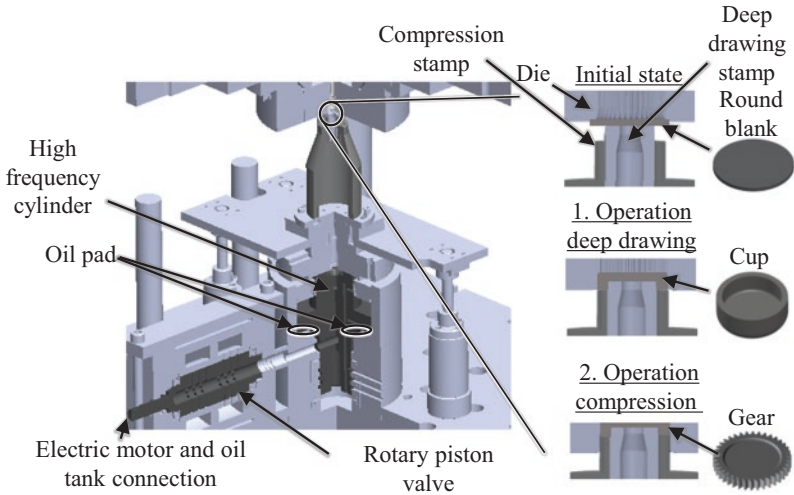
Tool system for superimposed oscillation compression of a gear.
